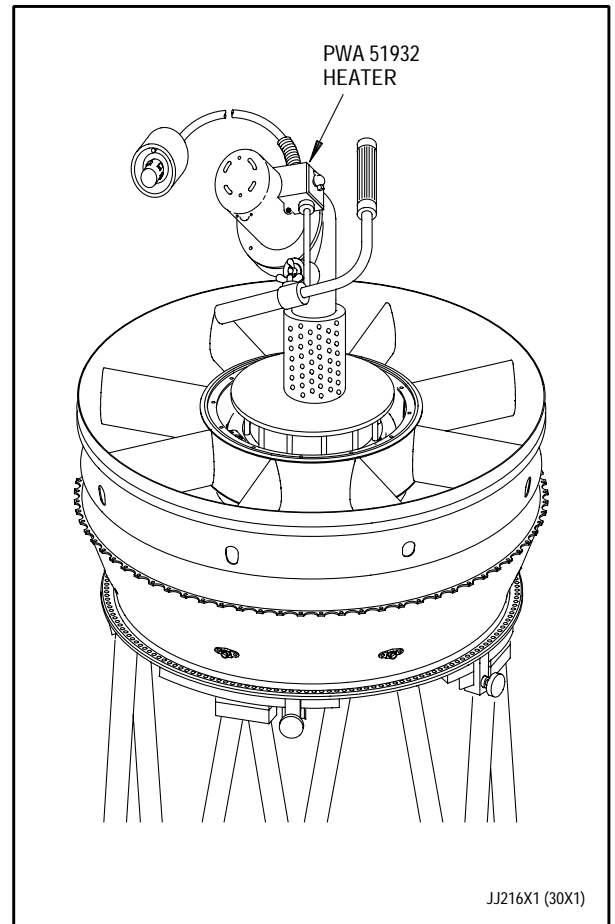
No. 5 Bearing Outer Race and Outer Race Retaining Nut - Installation (Sheet 1 of 4)
